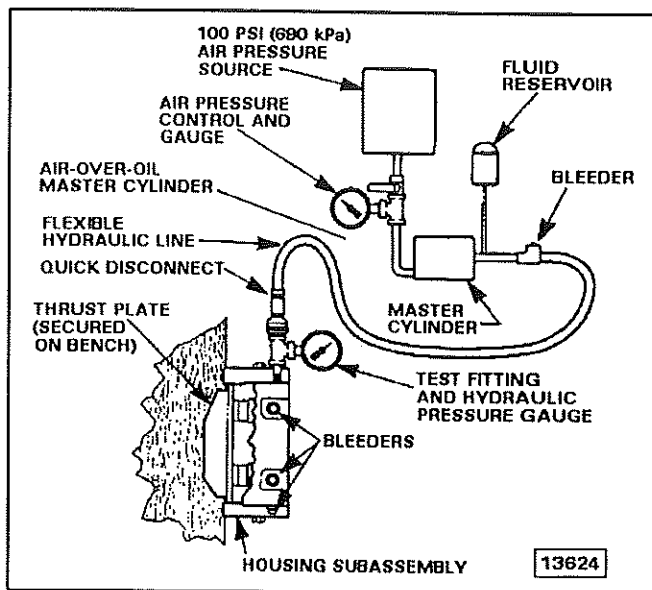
BRAKE FUNCTION TEST SET-UP
